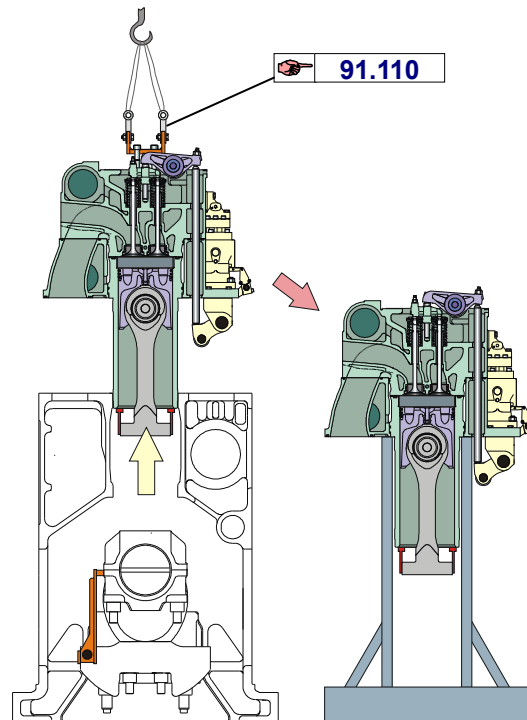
Place the cylinder unit on the stable working stand (실린더 유니트를 작업대에 내려놓음)
